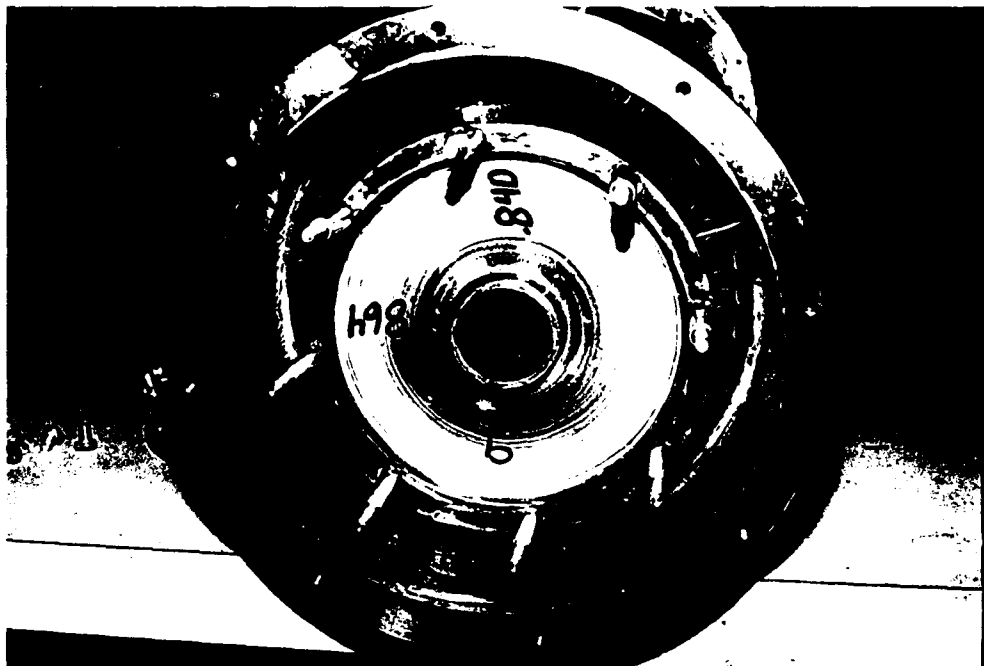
PROTOTYPE HEAT EXCHANGER WITH ACCESS COVER REMOVED
